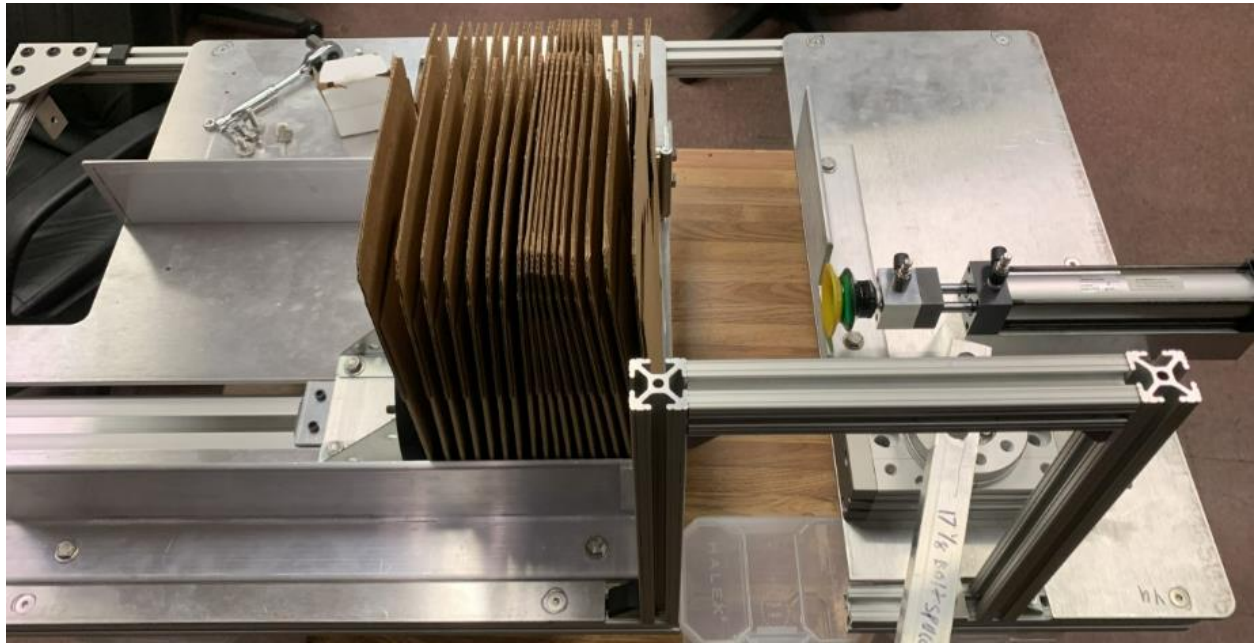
Partial assembly of the case erector machine, showing the T-slot framing attached
